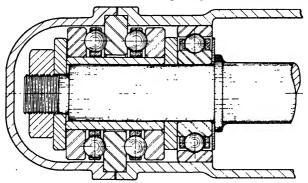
R. and M. RADIAL AND DOUBLE THRUST BEARINGS
